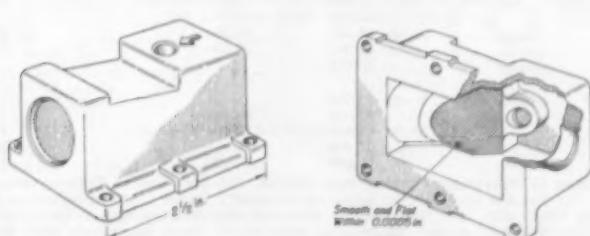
Valve Body Made of Alloy 380 as a Die Casting Because Surface Finish Tolerance Could Not Be Met with a Permanent Mold Casting
